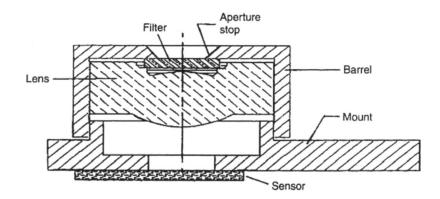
A small image-forming optical system featuring injection-molded plastic optical and mechanical parts. (From Baumer et al.³³)
